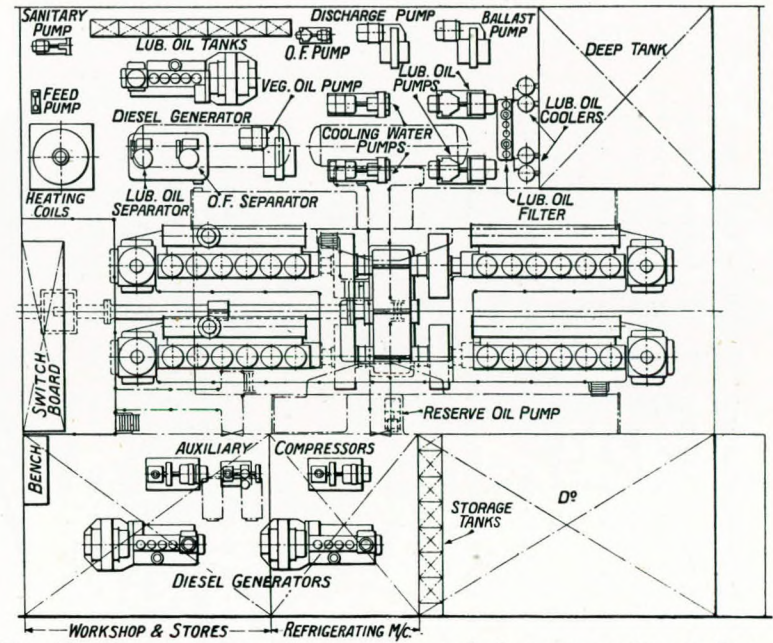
Arrangement of diesel engines and electro-magnetic couplings in the "Dagmar Salen".
